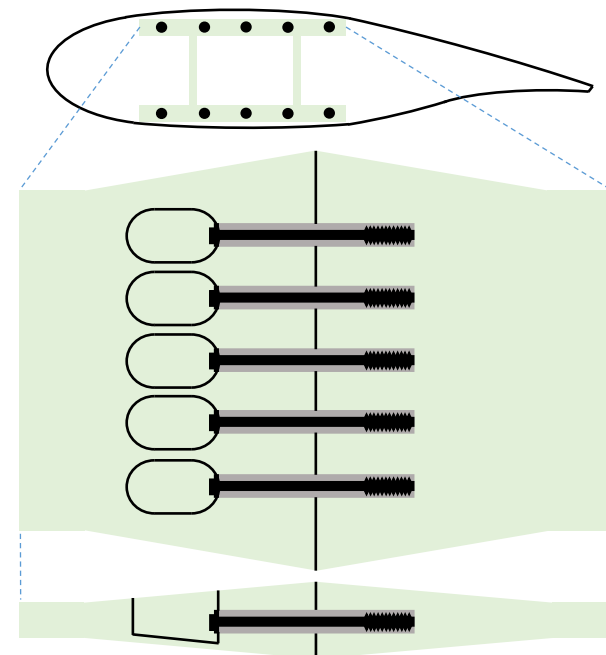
(Top) Cross-sectional view of the modeled embedded bushing joint, showing insert holes on spar cap pressure and suction sides. (Bottom) Top and side views of half of the modeled embedded bushing joint, consisting of a spar cap, inserts, and bolts. Each insert is held in compression by a bolt and is glued to the root and tip sections of the spar cap, which is enlarged to support the joint.
